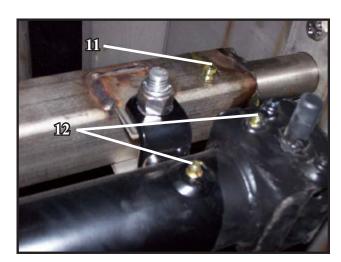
Spinner - Grease Zerks -Shaft & Jack
